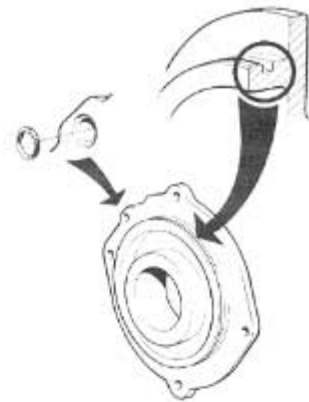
Sealing crankcase – bearing housing, MD1B, MD2B
